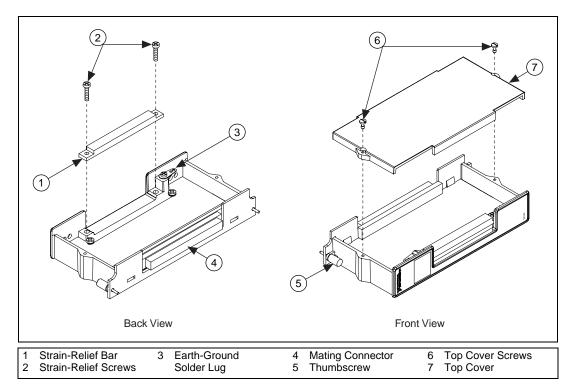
SCXI-1300/1301 Parts Locator Diagram
